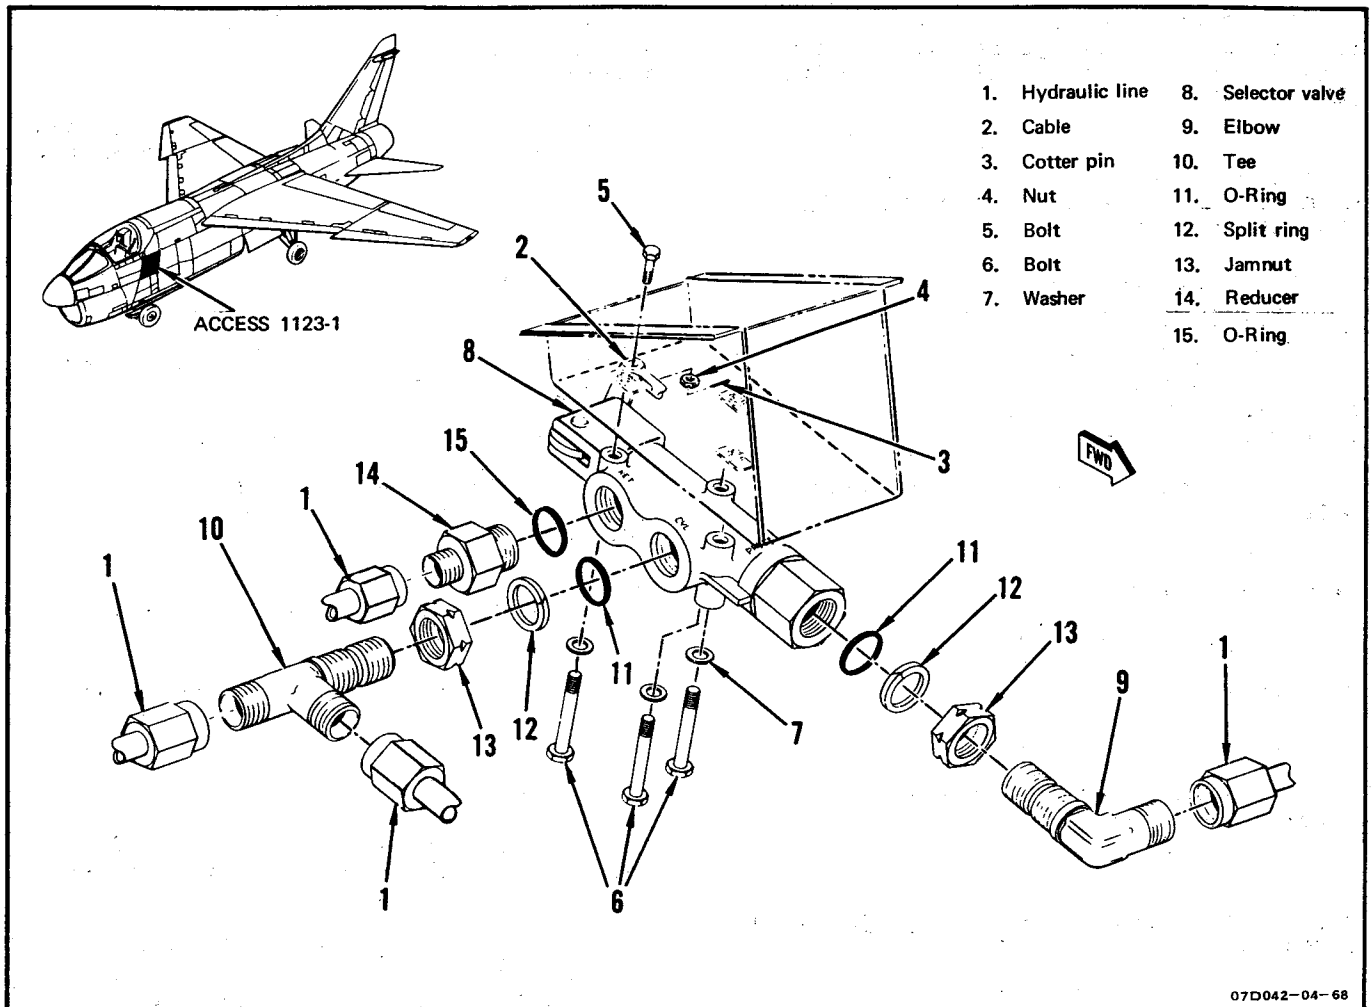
Emergency Landing Gear Selector Valve Removal and Installation
